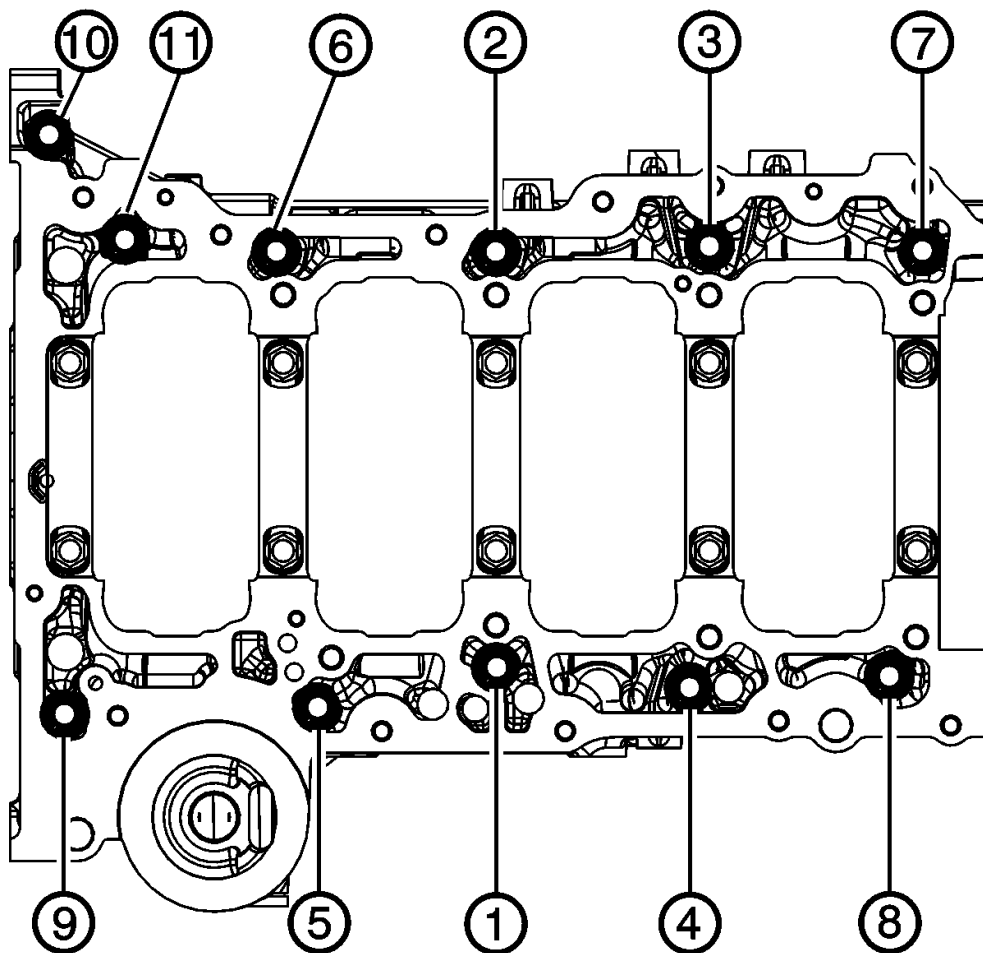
Lower Crankcase Perimeter Bolts In Sequence
